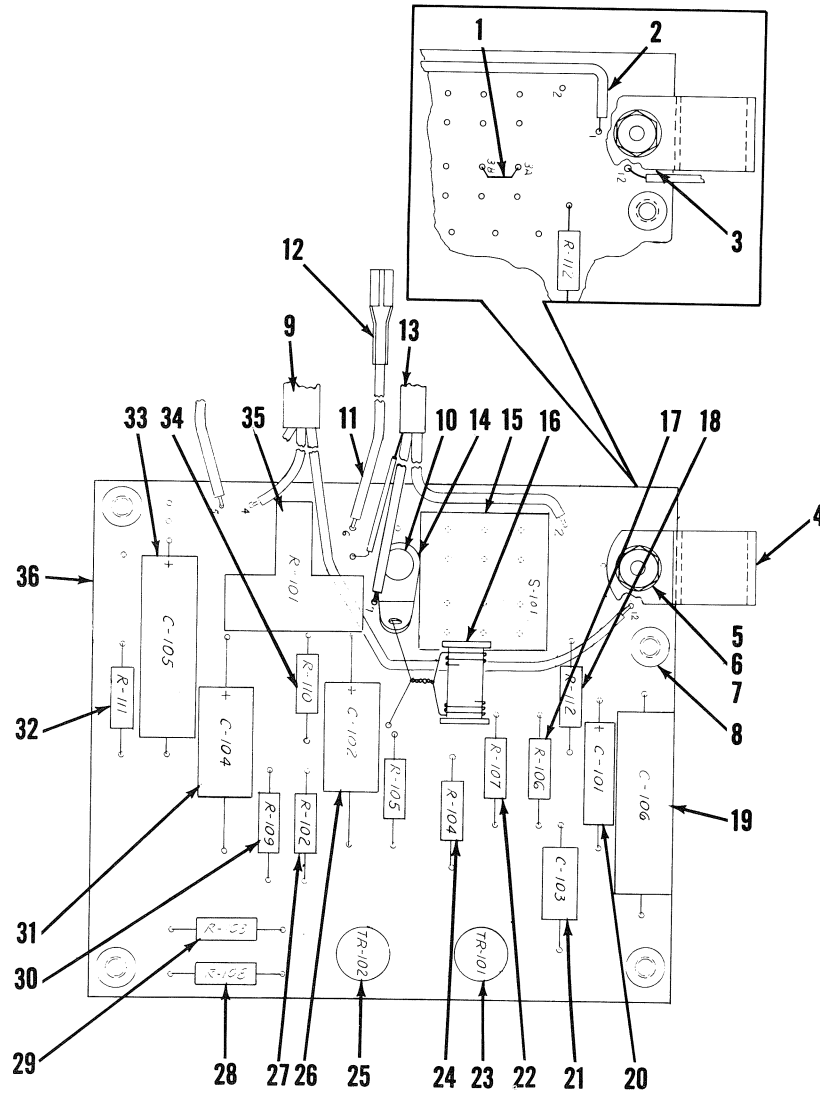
PREAMPLIFIER CIRCUIT BOARD COMPLETE
